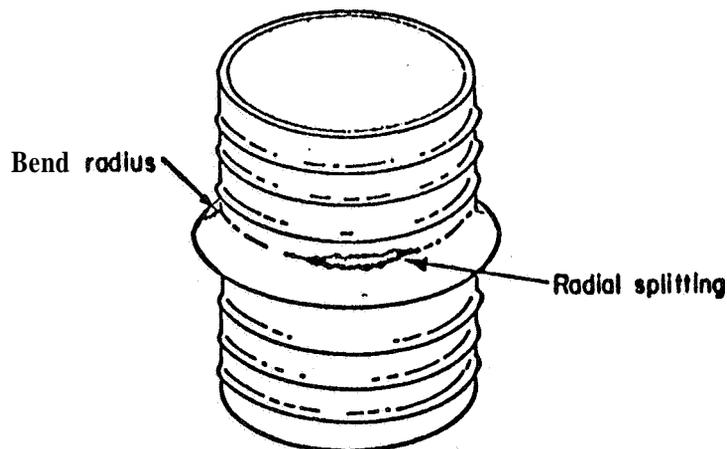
EXAMPLE OF FAILURE IN TUBE BULGING (Ref. 66)
